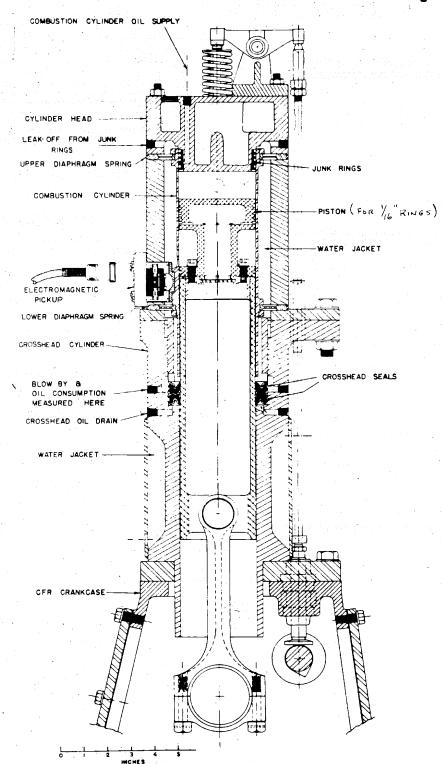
Figure I - Engine, showing crosshead and spring-mounted combustion cylinder. Piston For 1/6" RINGS (From NACA TH No 1249 By LIVENGOSO)
